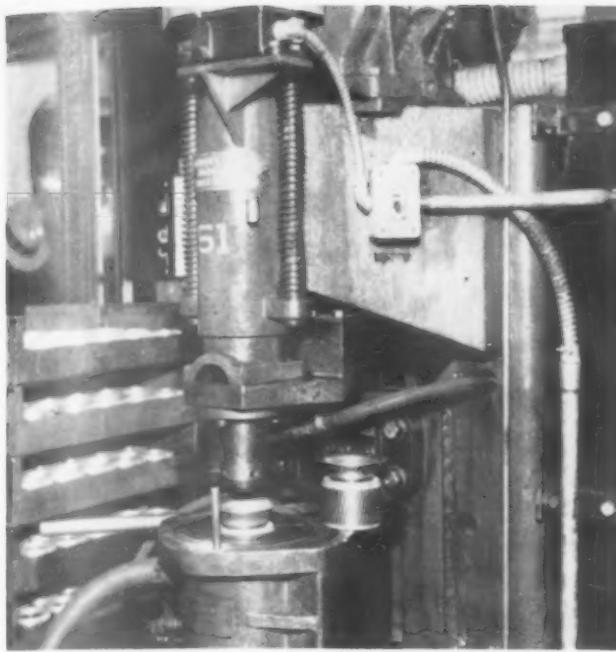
Fixture above was designed to projection-weld a baffle to motor rotor. Consistent welding was not possible when current was passed through entire rotor, so upper $\frac{1}{8}$ in. of laminations was clamped and current carried through from there, facilitated by an air, draw-in collet-chuck-type fixture, undercut so that jaws clamped upper $\frac{1}{8}$ in. only.
